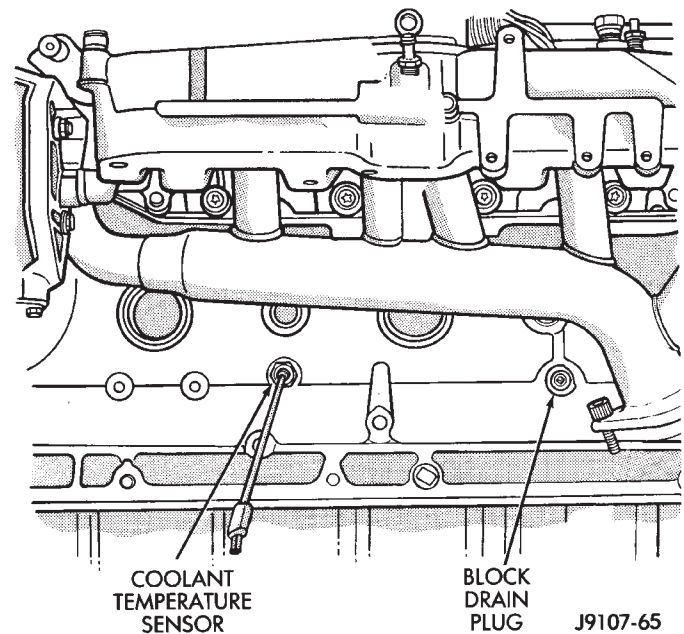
Drain Plug—4.0L 6-Cylinder Engine
